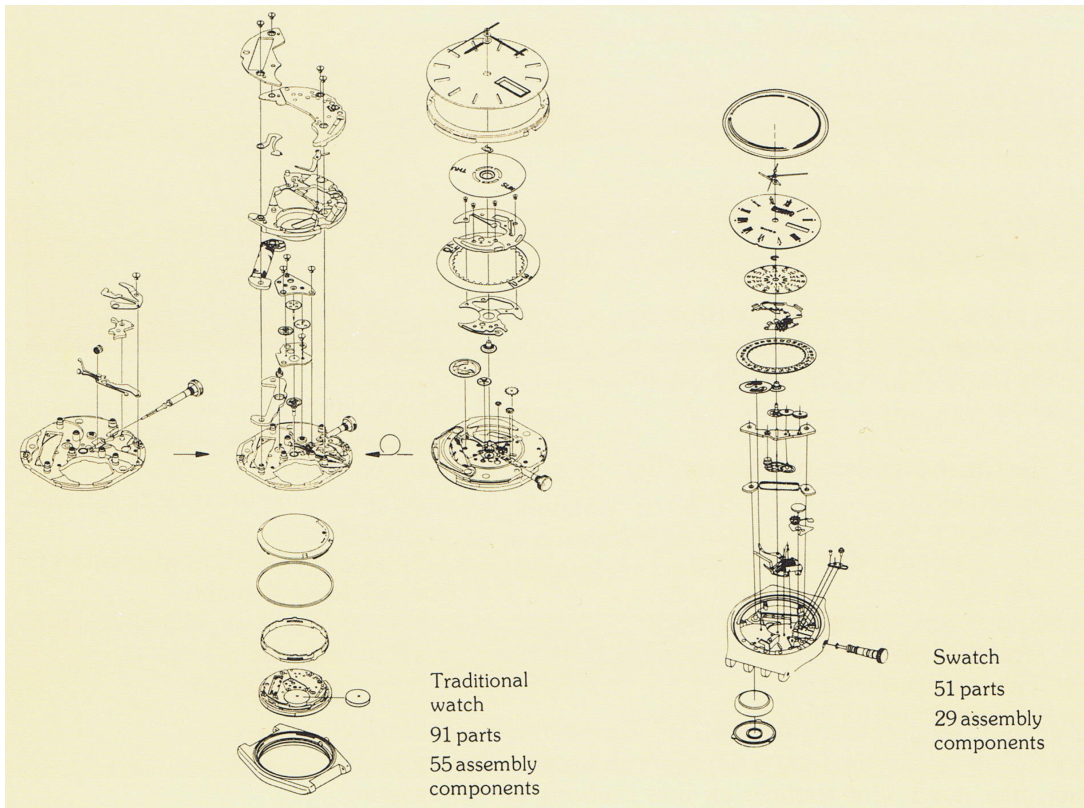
The more traditional design with 91 parts and 55 assemblies vis-à-vis new Swatch design with 51 parts and just 26 assemblies [Andreasen and Ahm, 1988].
